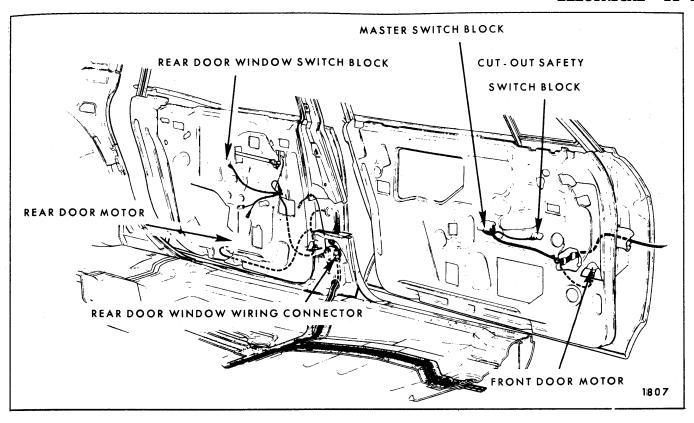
Left Side Power Window Wiring - Cadillac "39-69" Styles
